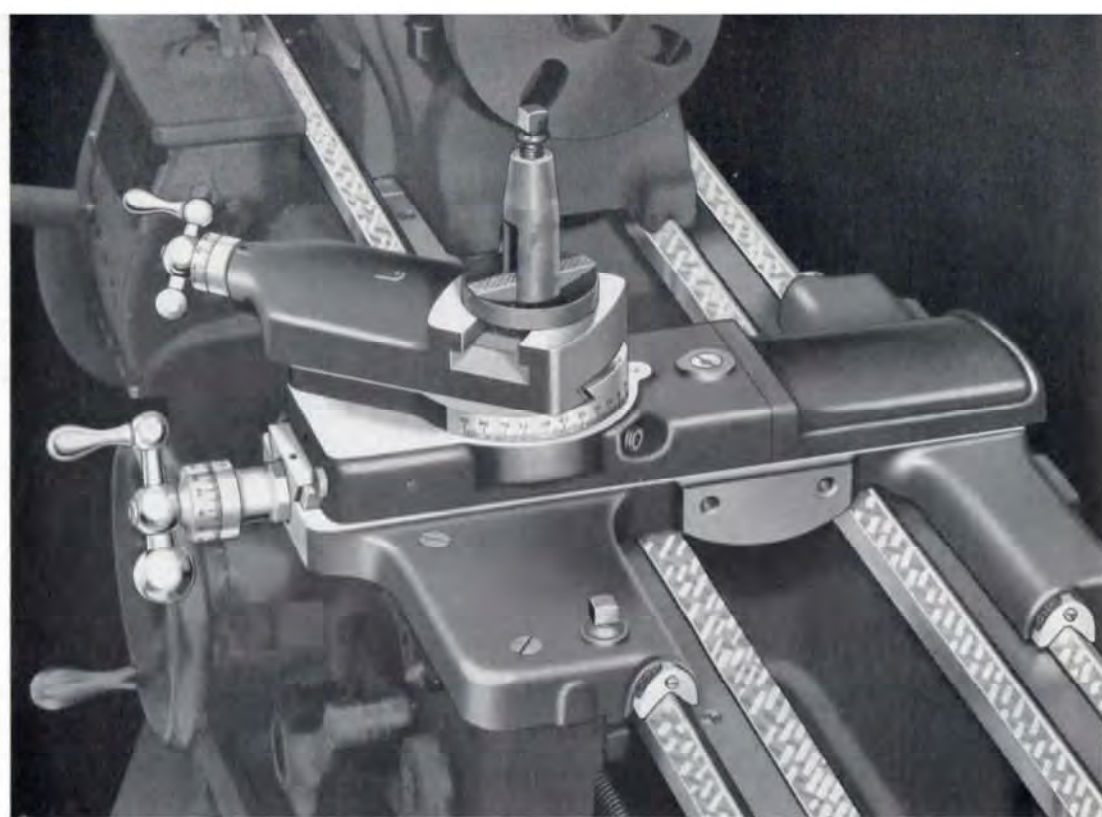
Improved Saddle and Compound Rest for South Bend Lathes
